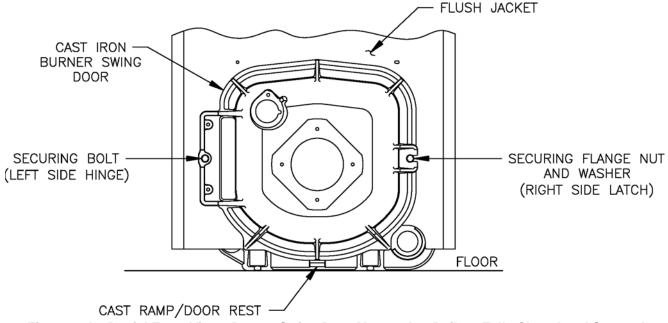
A: Partial Front View - Burner Swing Door Mounted to Boiler - Fully Closed and Secured
